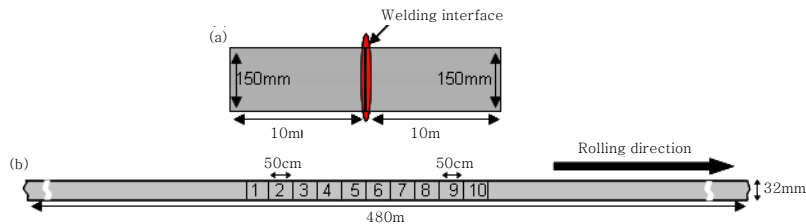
Test specimen extraction from steel bar (a) Joining two billet (b) Specimen numbering from steel bar
